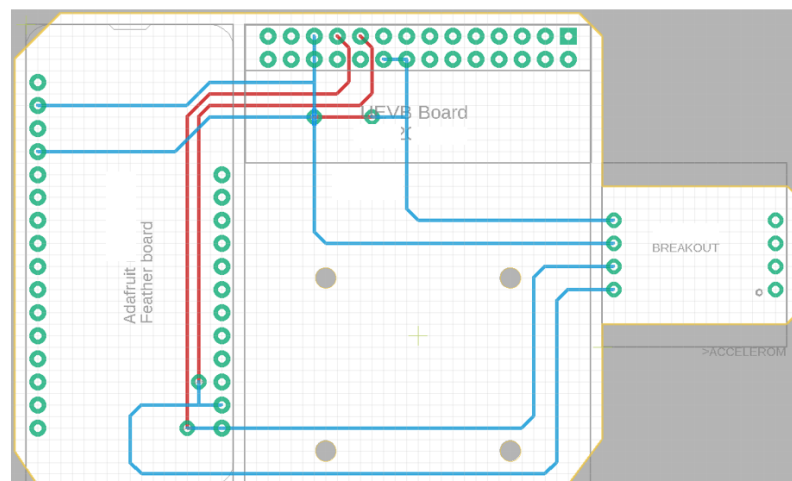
PCB layout with breakout boards of SoC, gyroscope and accelerometer
